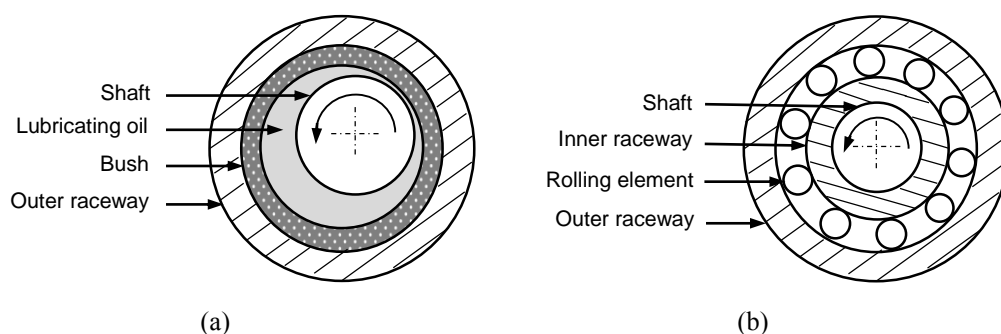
Representation of contact bearings (a) Sliding contact bearing; (b) Rolling contact bearing
